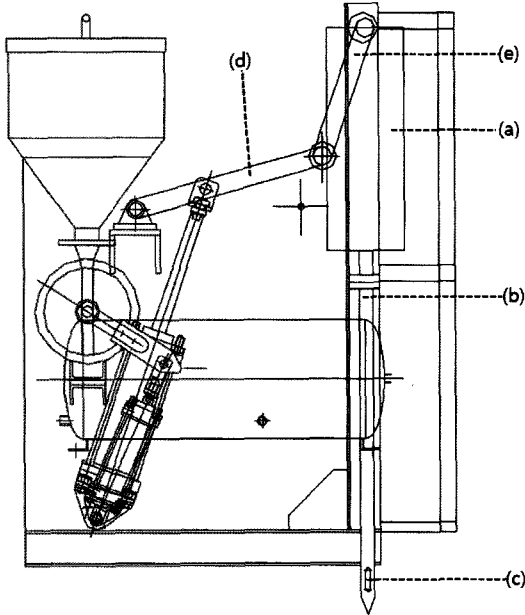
Soil penetration part of Explosive subsoiler. Where, (a) Air hammer. (b) Penetration rod. (c) Injection nozzle. (d) Lower link. (e) Top link.
